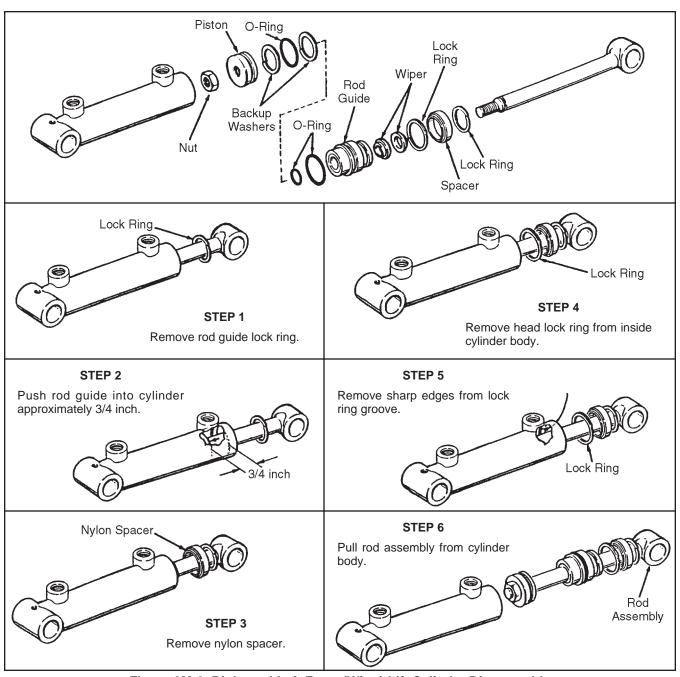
M-2. Right and Left Front (Wing) Lift Cylinder Disassembly
